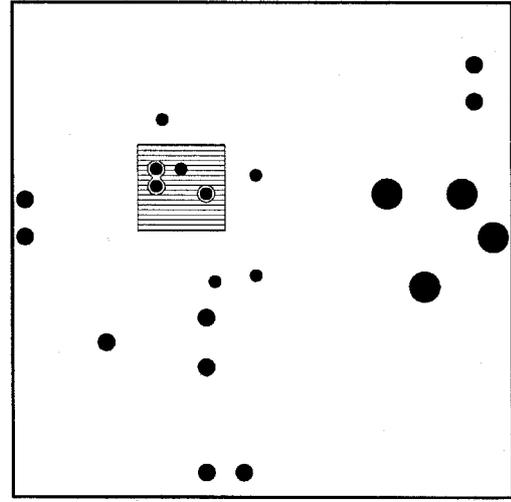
Recommended micro SMD PC board layout: Inner layer  $V_{CC}$  layout
